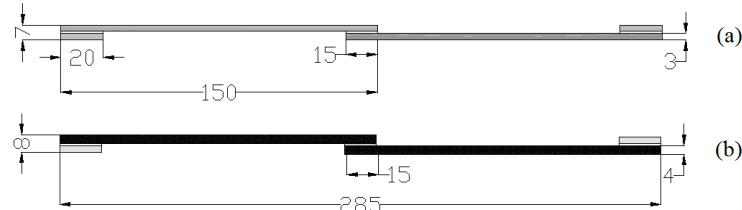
Dimensions of experimentally tested specimens. The width of the specimens is $b = 25$ mm. (a) aluminum specimens; (b) steel specimens.
